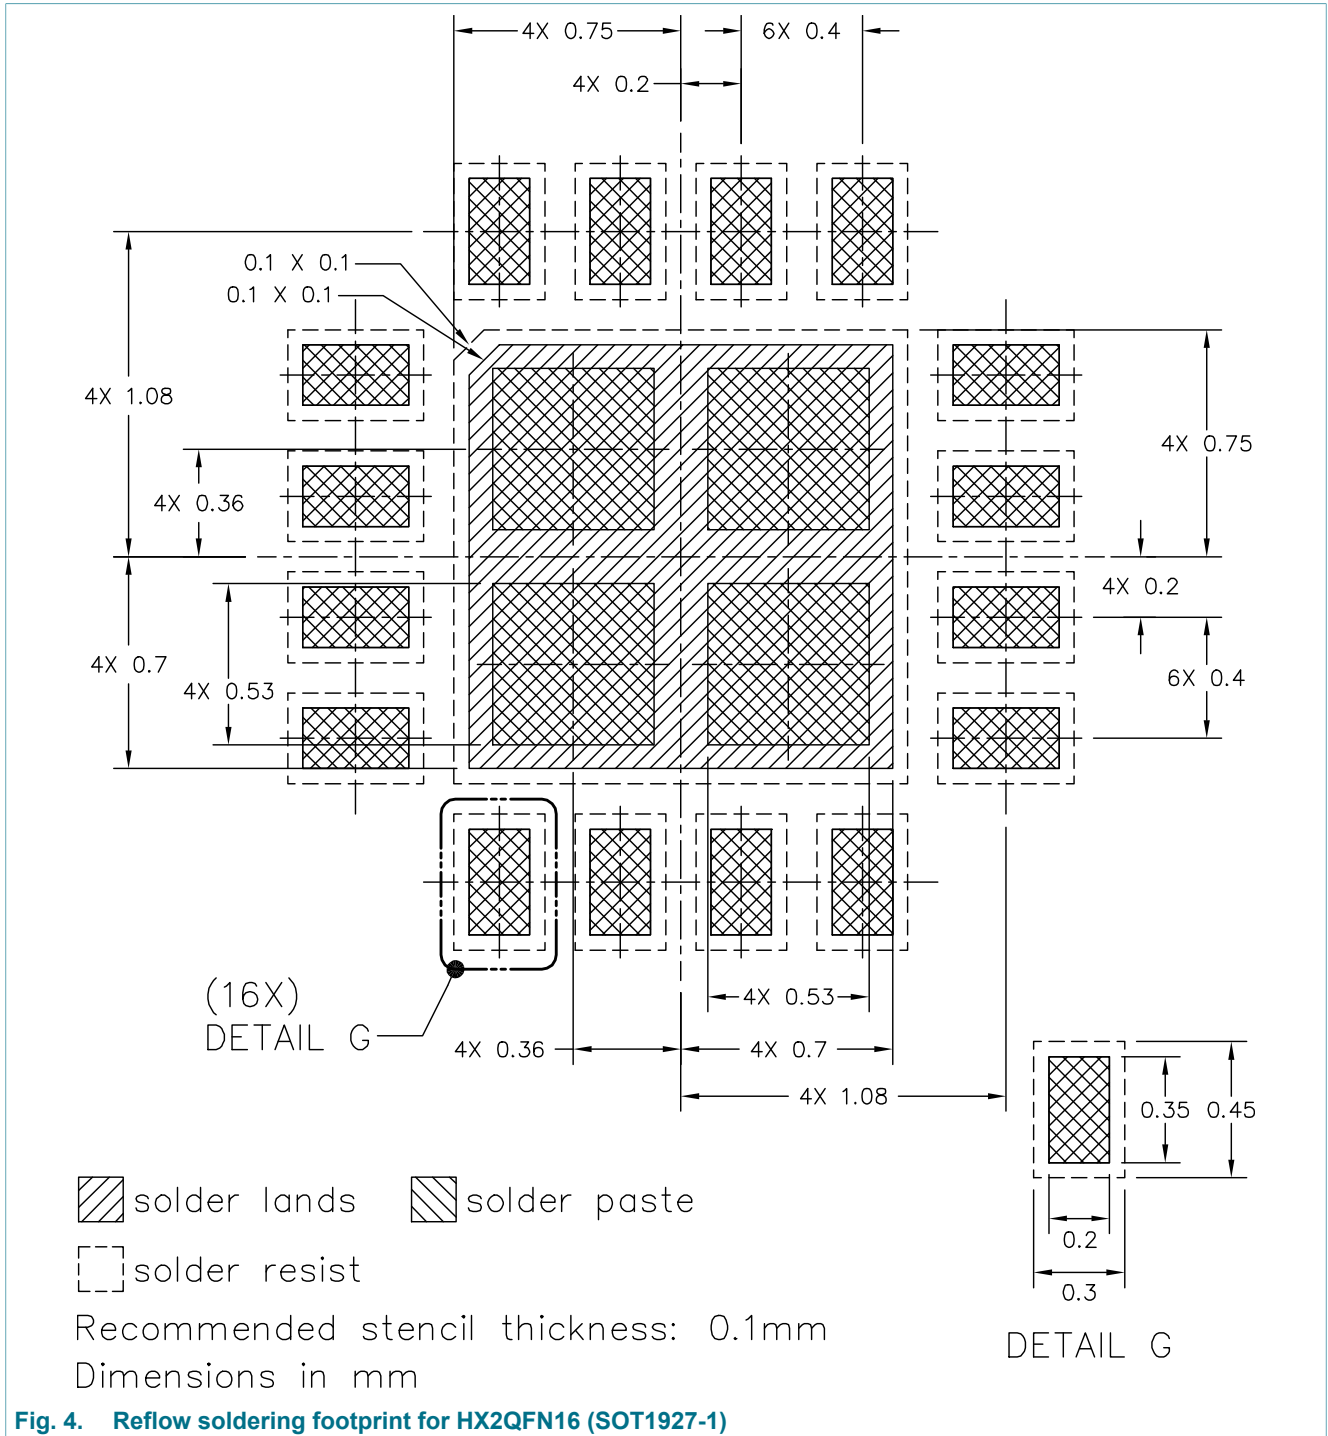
Reflow soldering footprint for HX2QFN16 (SOT1927-1)
